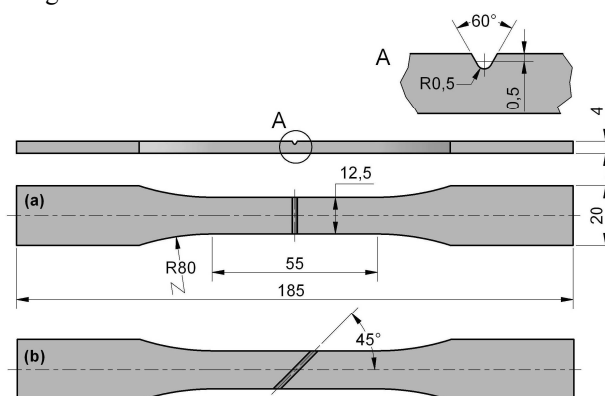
Geometry of the rectangular cross-section specimens used in the tests (dimensions in mm)
